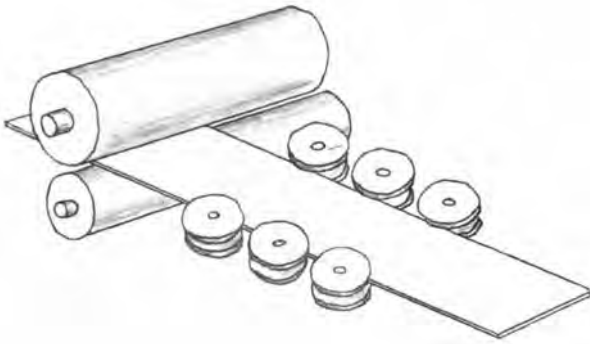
K20 Edge rolling uses pressure rollers at the edges of a strip of sheet metal to force burrs down against the sheet after slitting or shearing operations.
